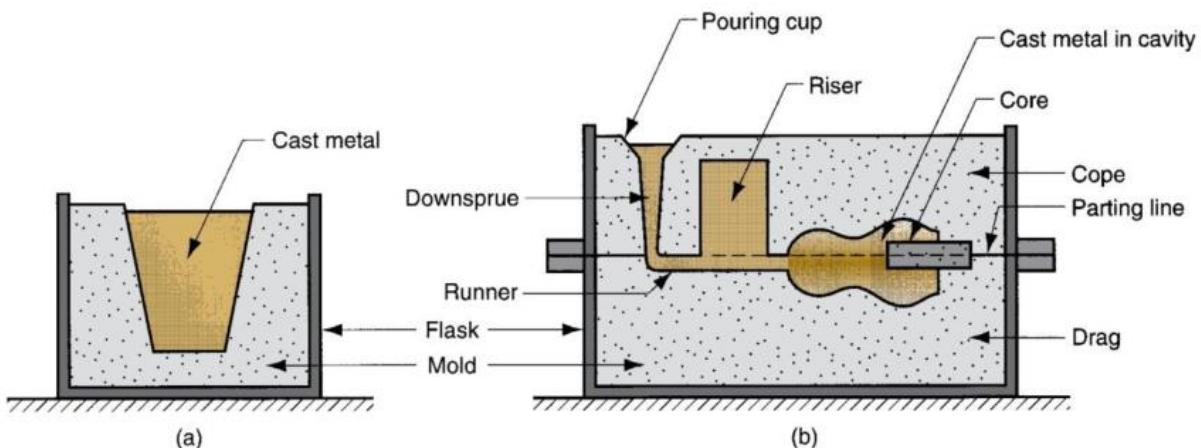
A diagram showing the sand casting process and the components involved. (a) depicts a simplified heads on view of casting. (b) displays a cross-section perspective of sand casting with relevant features labeled[1].
